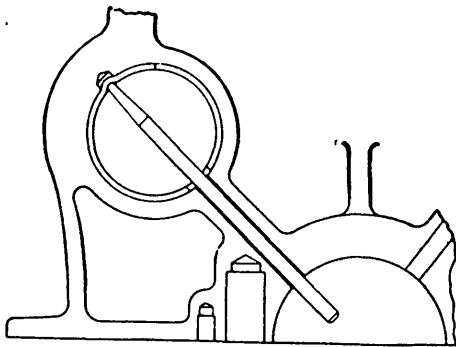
Using round-nosed punch to stake camshaft bearings in place. 1935-52
